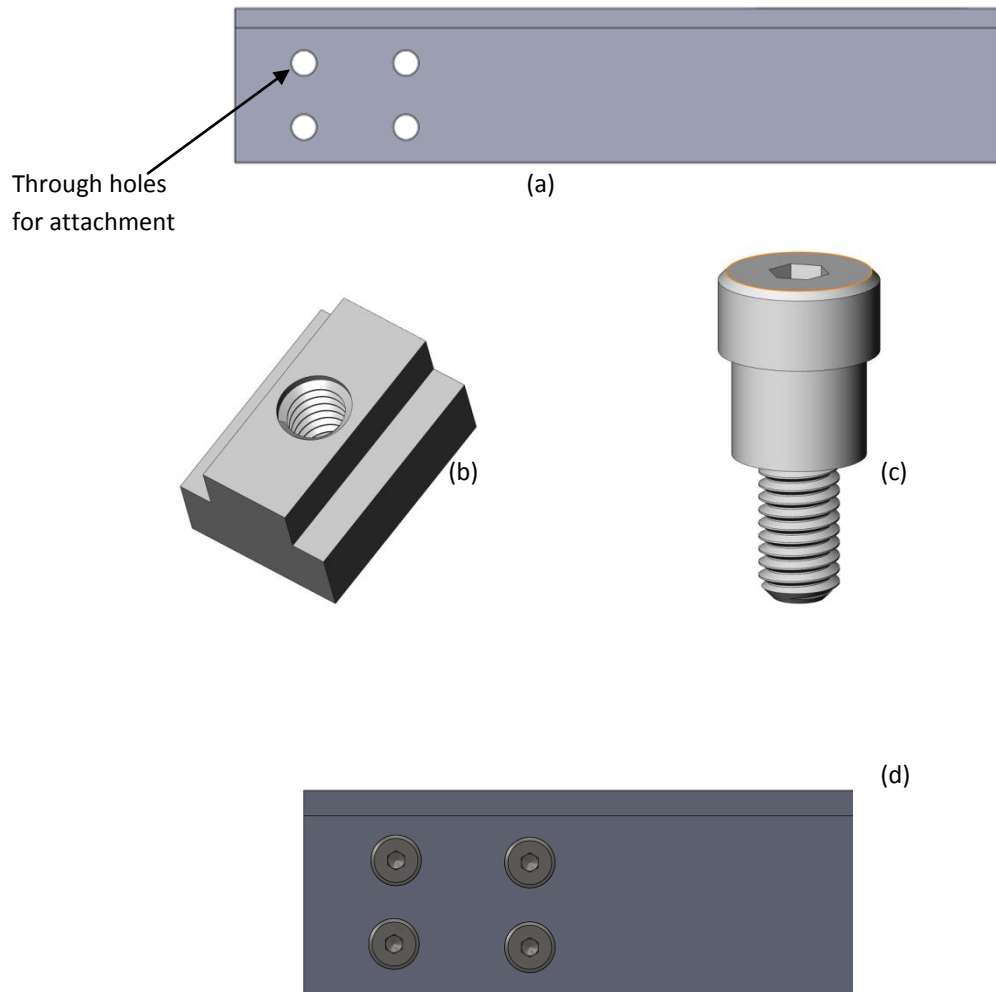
The clamping system and its components: (a) back plate with through holes; (b) T-Key inserted to the Instron® upright column [38]; (c) shoulder bolt for fastening [39]; (d) assembled clamping system
